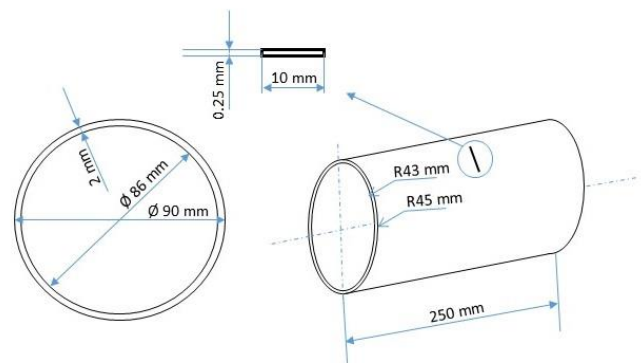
Dimensions of damaged Al 6063 aluminum pipe.
